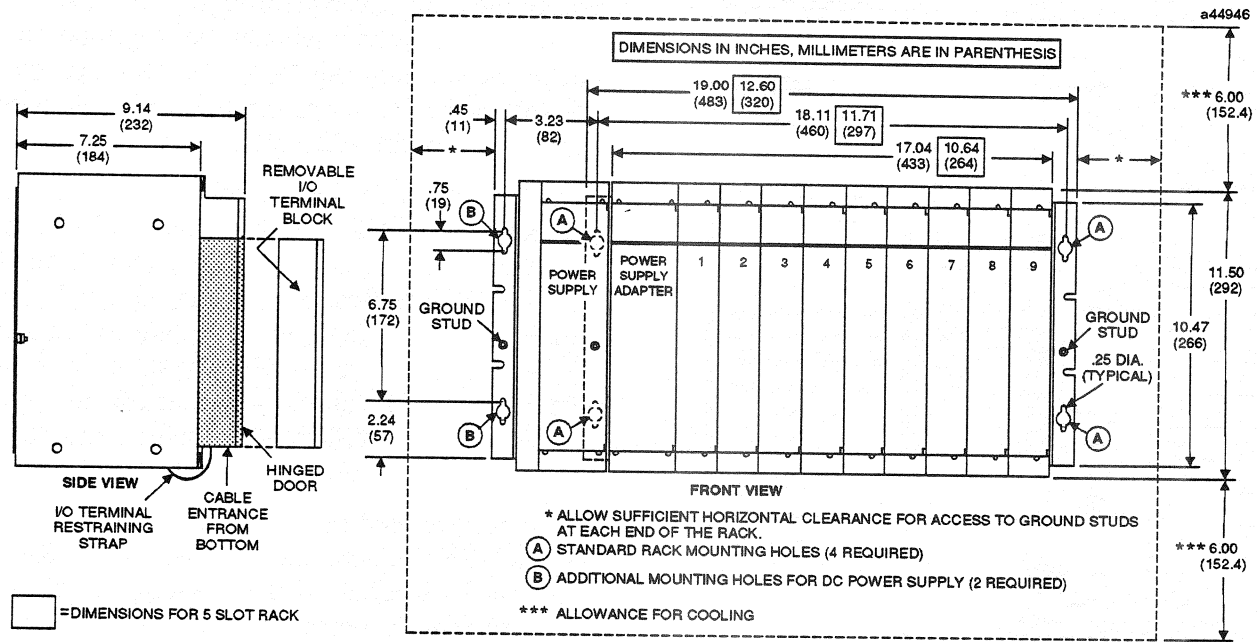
Rack Mounting Dimensions with DC Power Supply Attached
